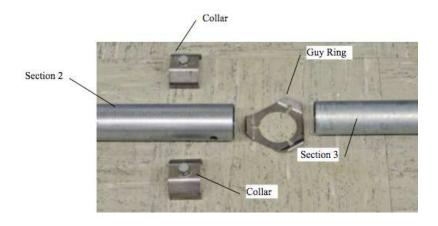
Guy Ring, Mast Section 2, and Mast Section 3
